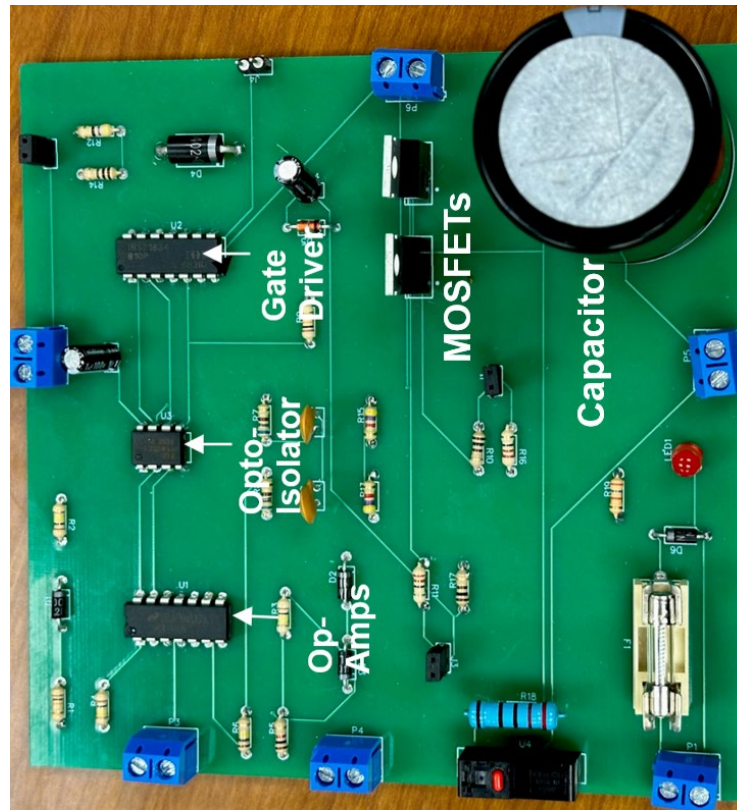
Fully designed and fabricated a cell with components on a PCB board
